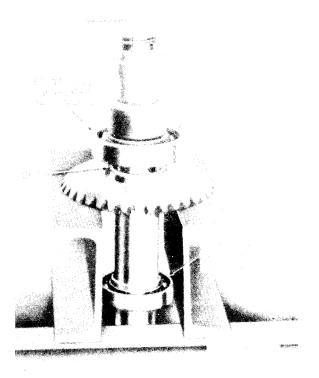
Pressing front bevel gearshaft ball bearing on gearshaft.
